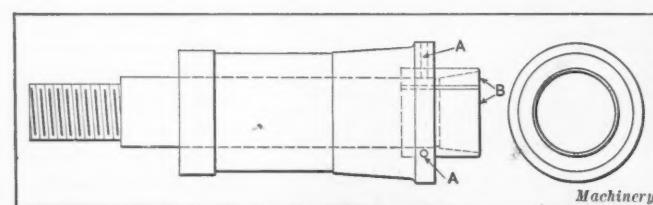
Expansion Collet Chuck for holding Loaded Fuse Rings while facing
